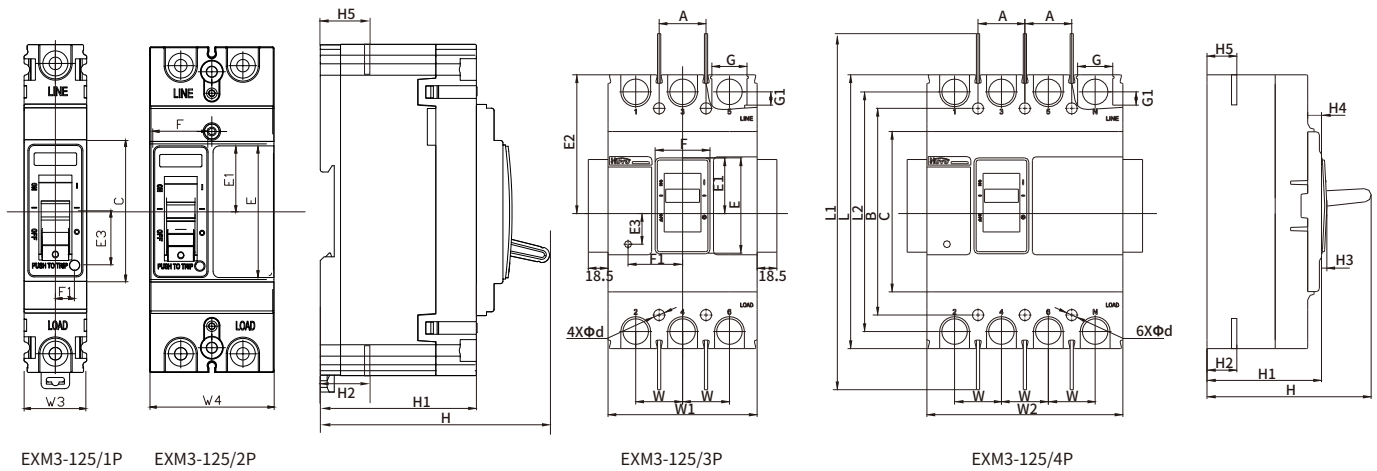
Front board wiring shape and installation size of EXM3-63 to 800
